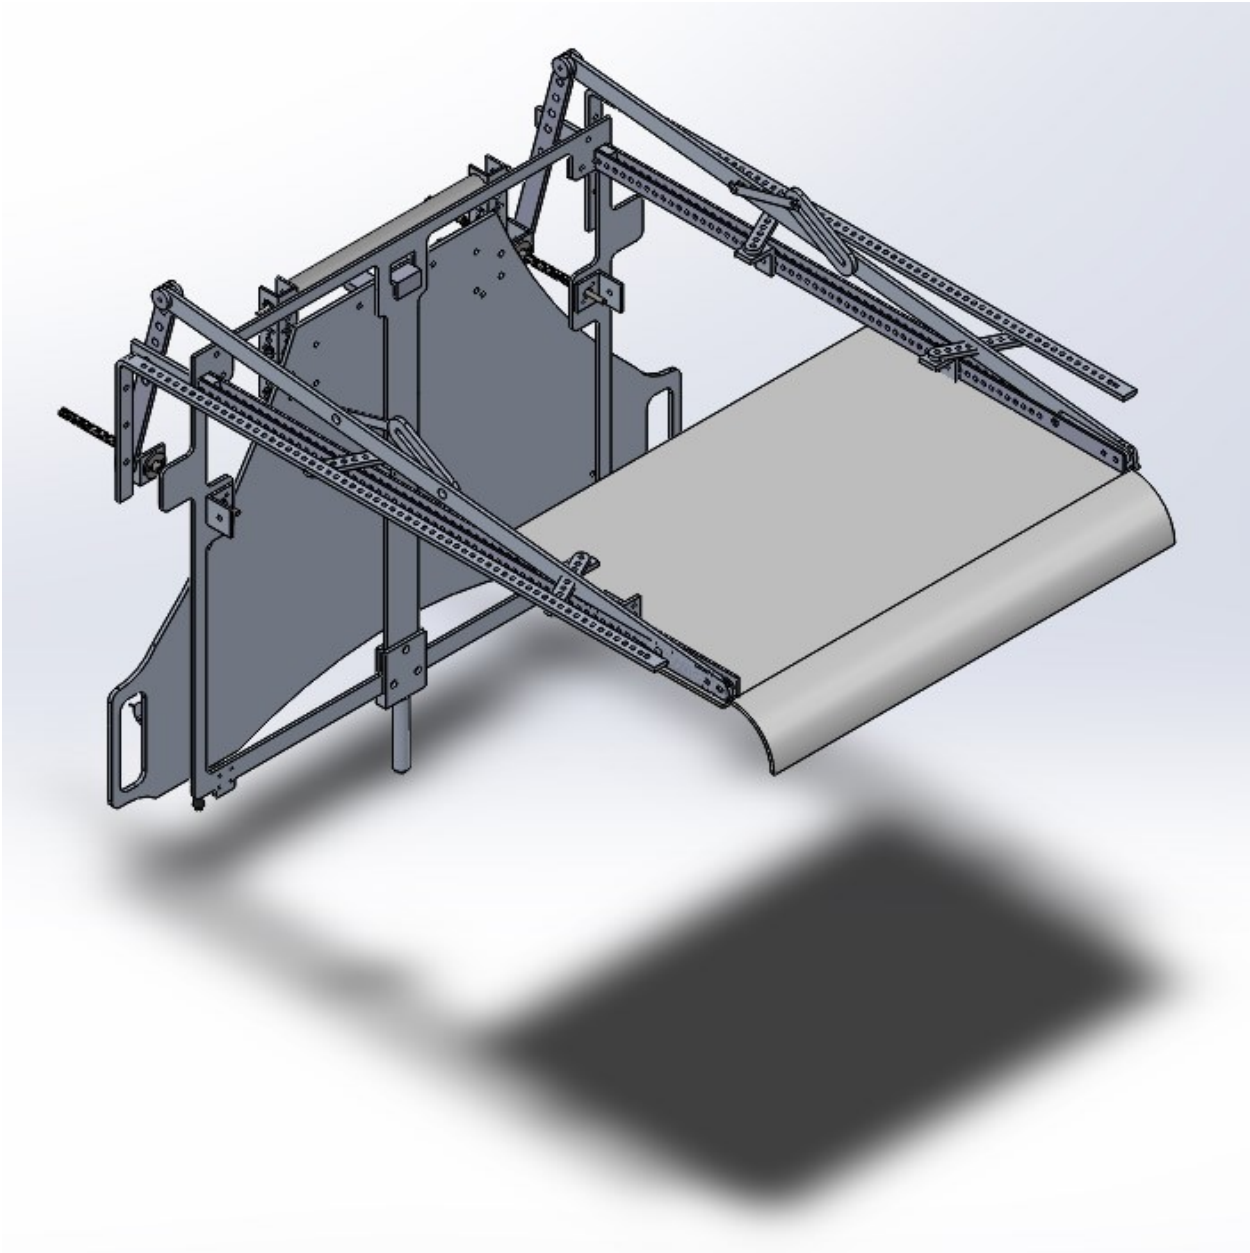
Isometric view of the winch mounting plate CAD model, with winch and accoutrements.
